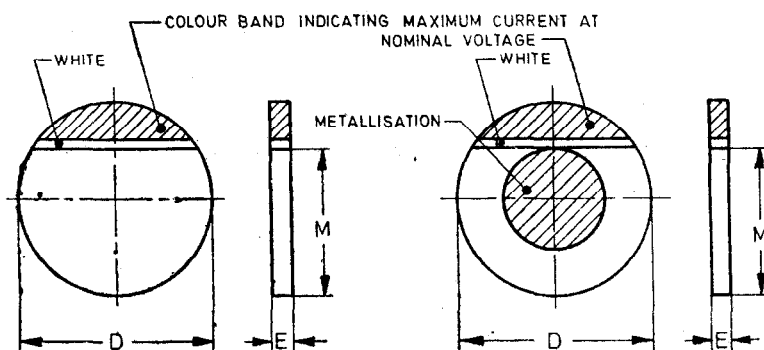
OUTLINE DRAWING AND DIMENSIONS
